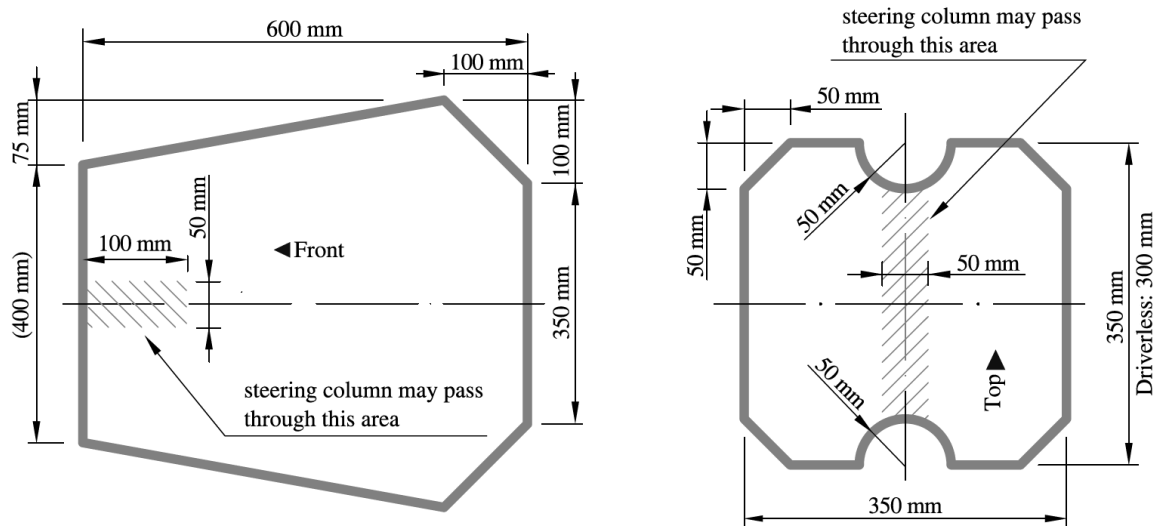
Cockpit opening template (left) and cockpit internal cross section template (right)
